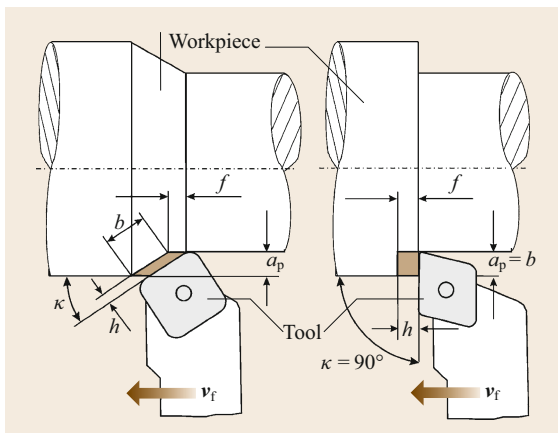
Cut and chip variables in turning; $A = a_p f = bh$, $h = f \sin \kappa$, $b = a_p / \sin \kappa$, $a_c = f$, with A = chip cross section, a_p = depth of cut, f = feed, b = chip width, h = chip thickness, v_f = feed speed, κ = tool cutting edge angle, a_c = width of cut
